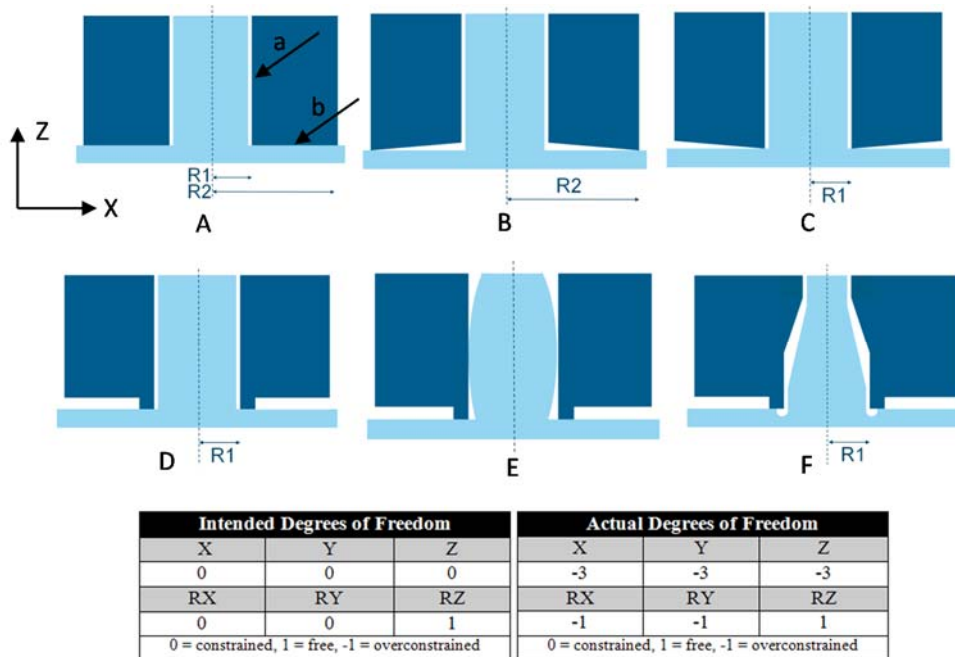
A gearwheel (dark part) runs on a center pin. The objective is to have low friction and a minimum of wobbling
